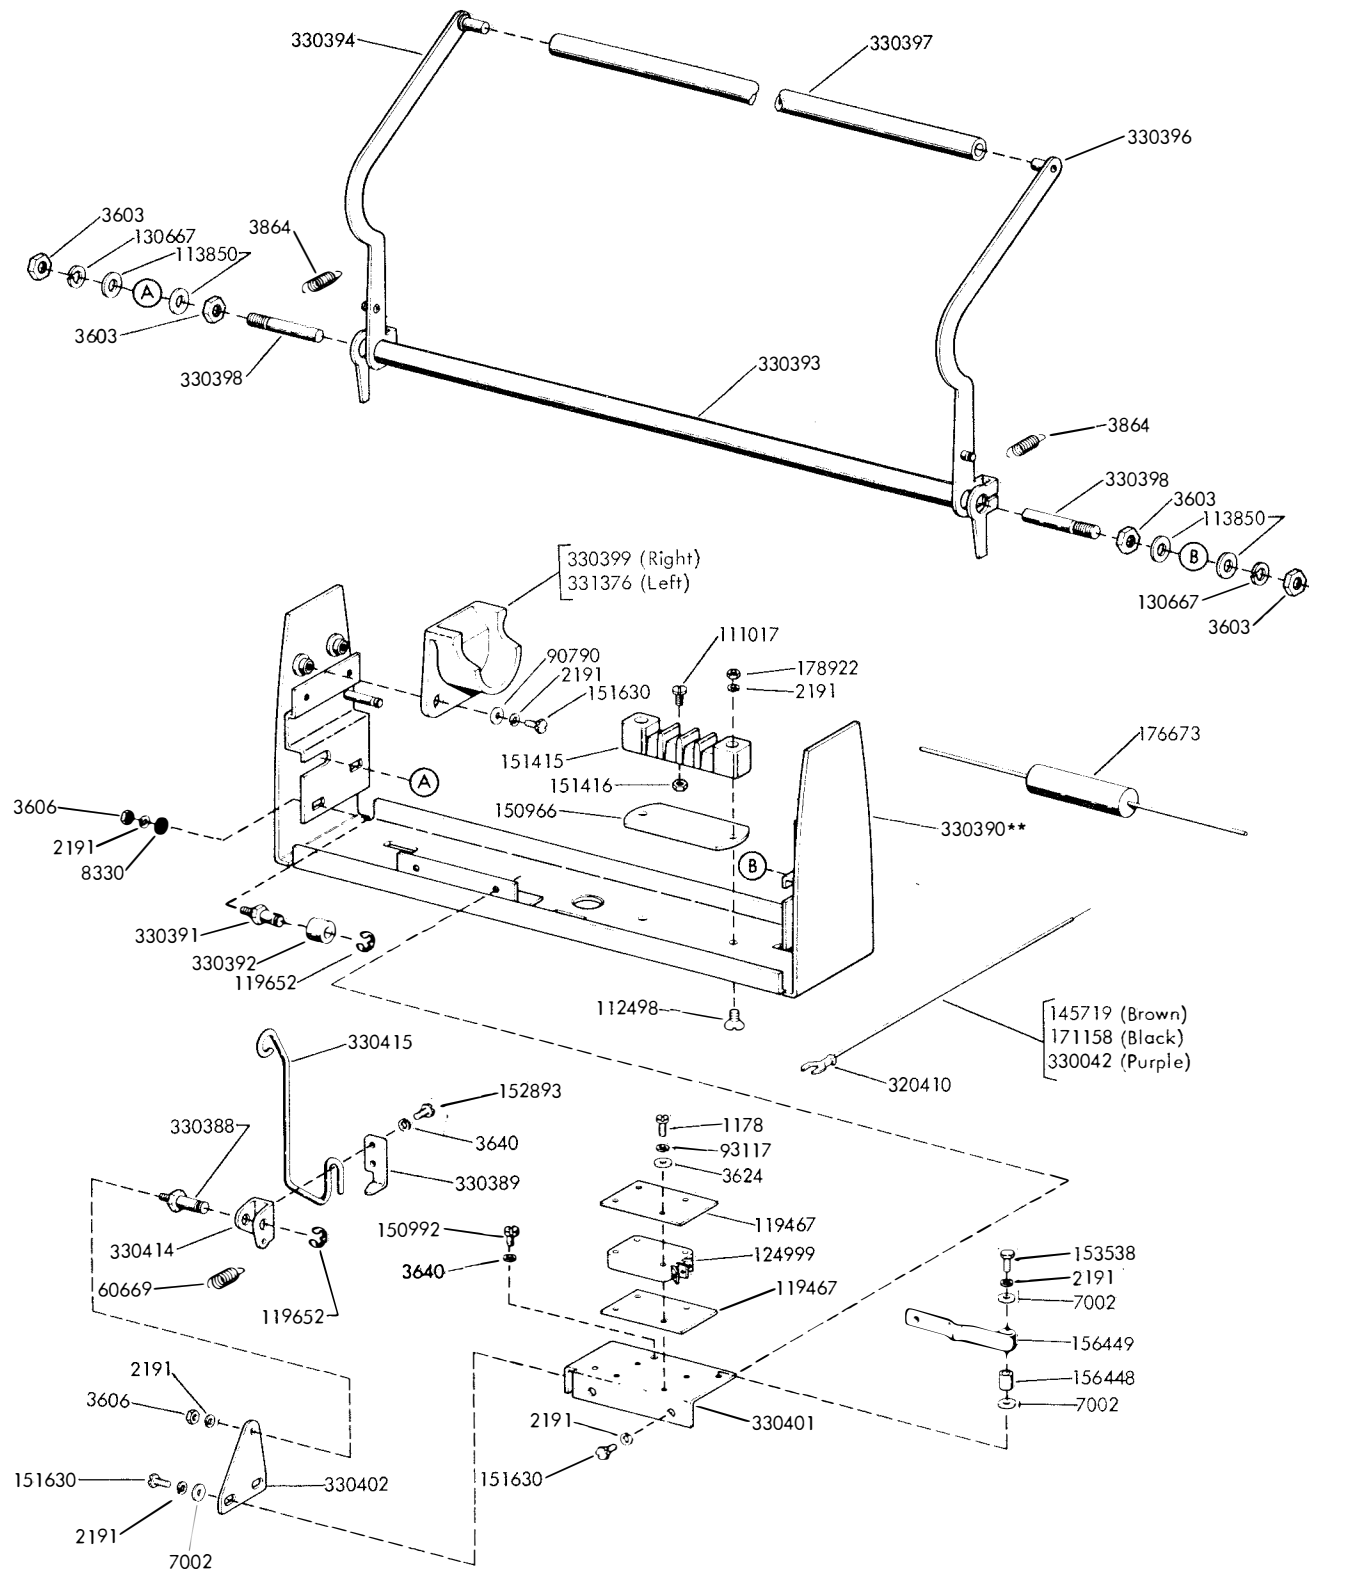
CABINET TOP AND LATCH MECHANISM
